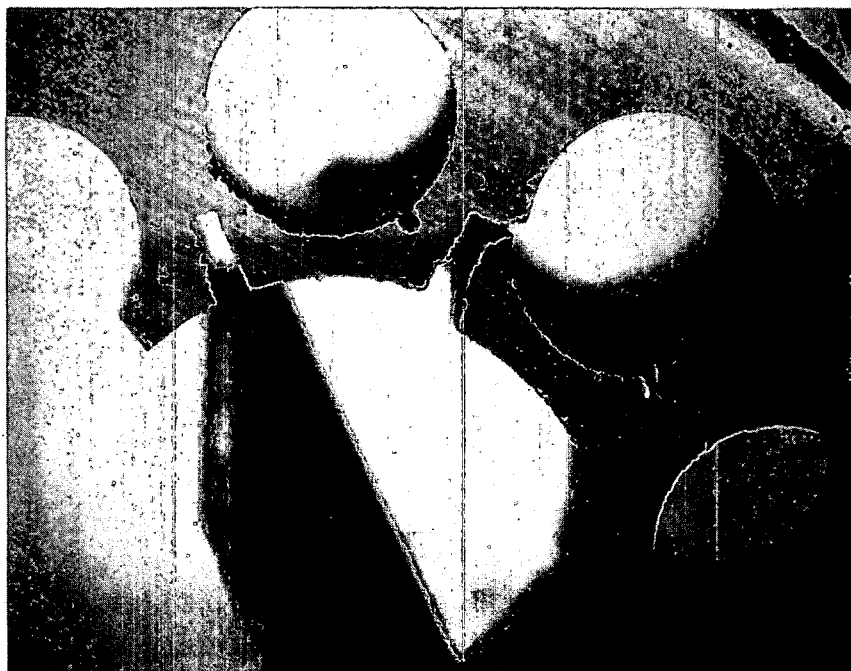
Different view of cracks shown in Fig. 7-13 demonstrating size of cracks
